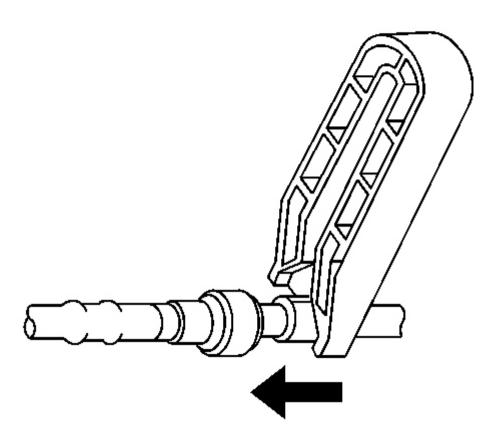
Releasing Locking Tabs (Metal Collar) Courtesy of GENERAL MOTORS CORP.
